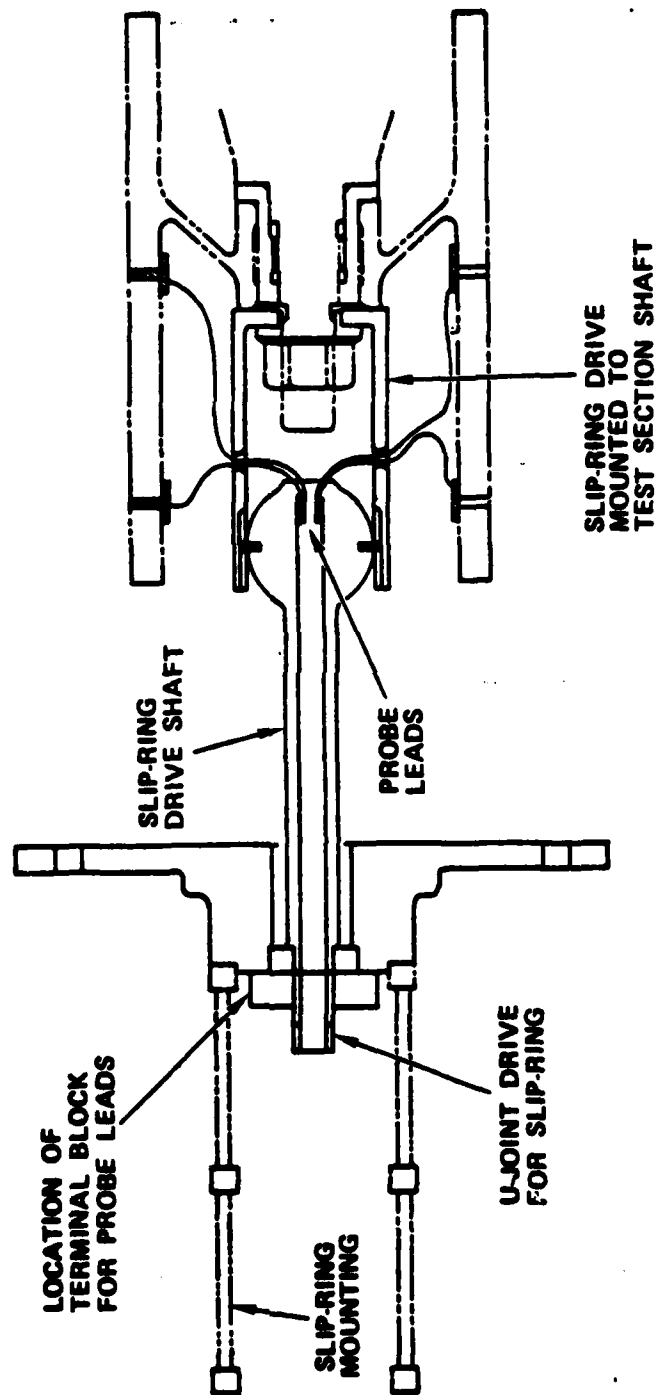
Probe Slip-Ring Installation on Basic Bearing Rig.
